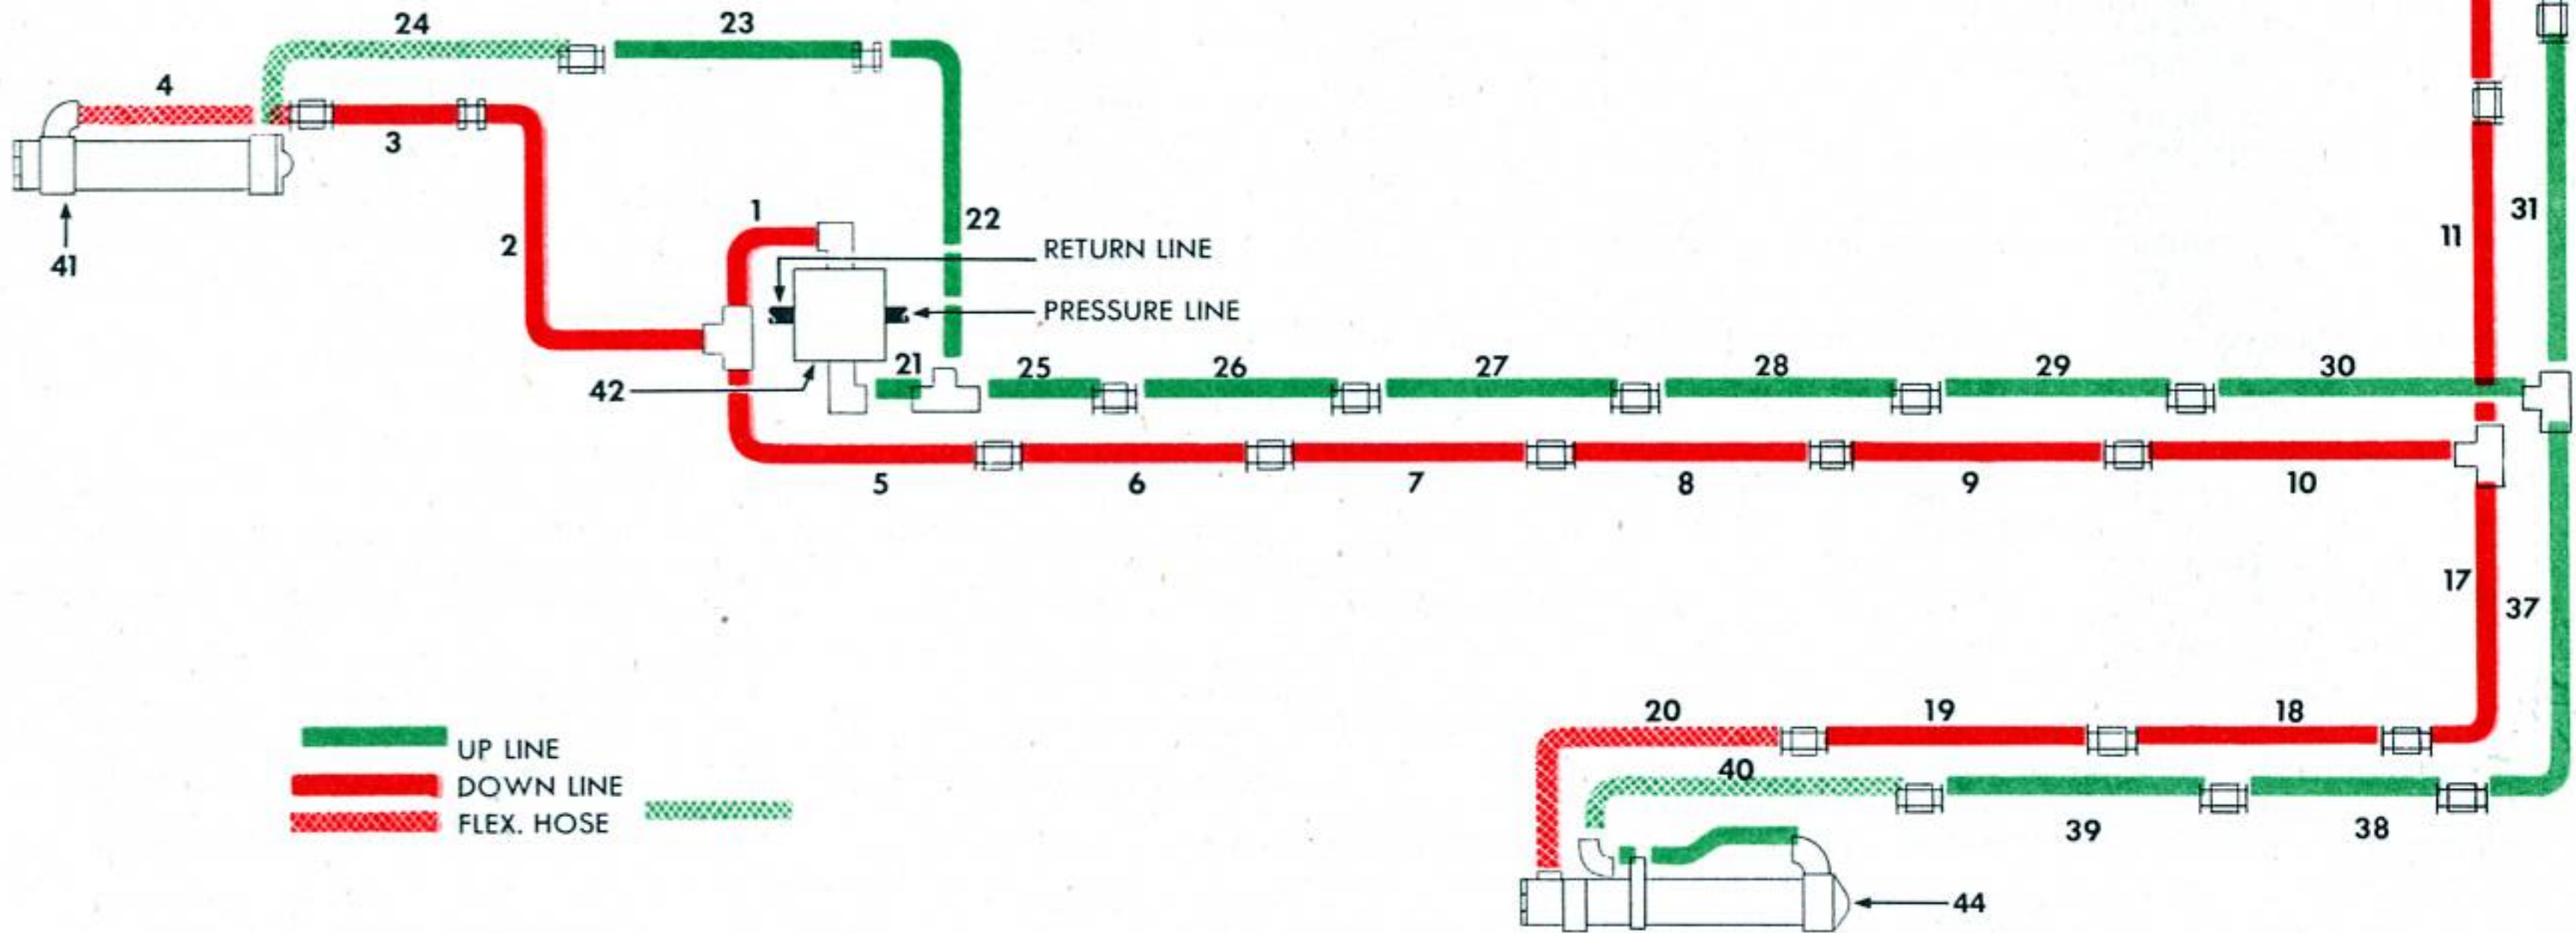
ALIGHTING GEAR HYDRAULIC SYSTEM
